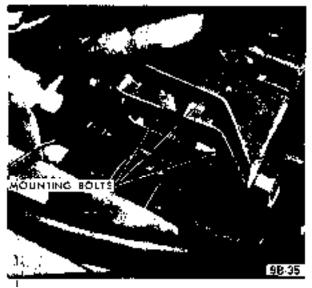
B-52 Location of Compressor Mounting , Support Bolts Opel 1900 Manta
